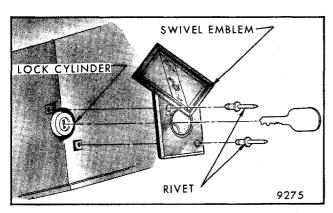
Typical Swivel Emblem - Rivet Retained - Oldsmobile C Style Shown
